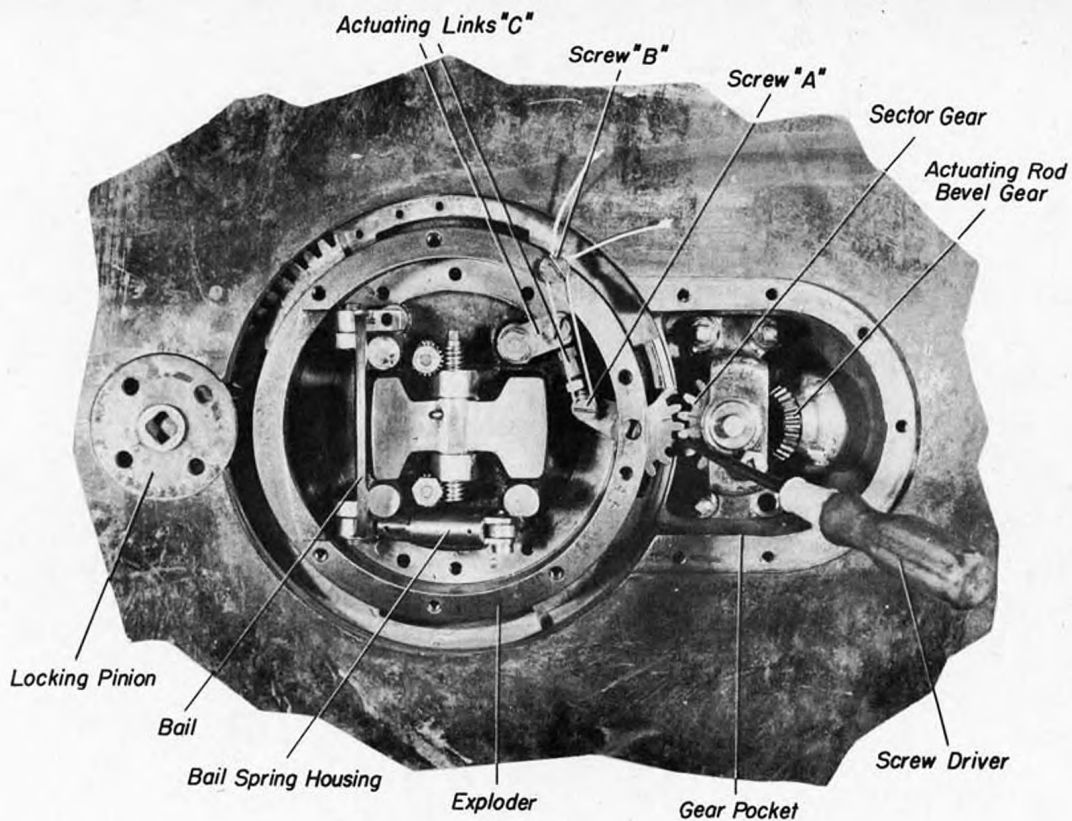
Type 3 Exploder, Arming and Firing Assembly
